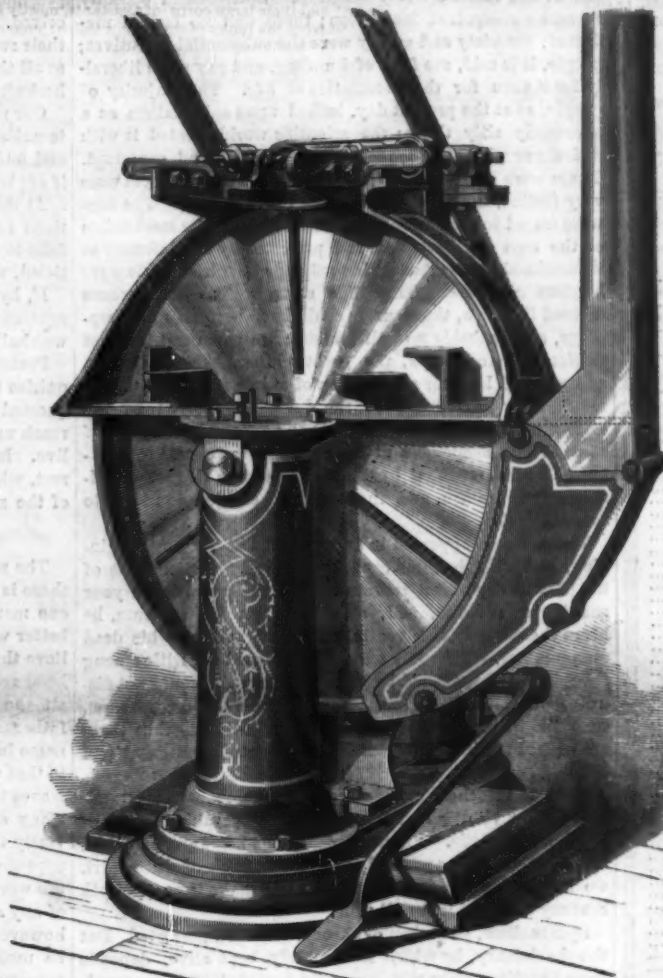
BARREL HEAD JOINTING AND BORING MACHINE.
